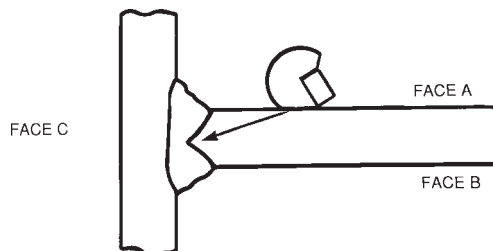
Technique 5, for Inspecting the Weld Volume of T-Welds
